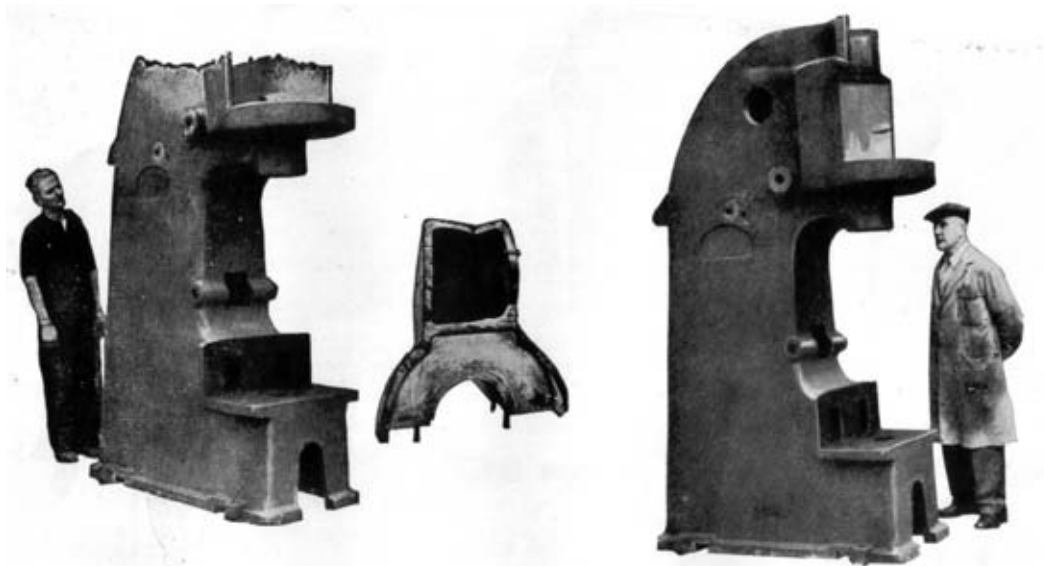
Powerful press used for crankshaft straightening, before and after repair by welding.
